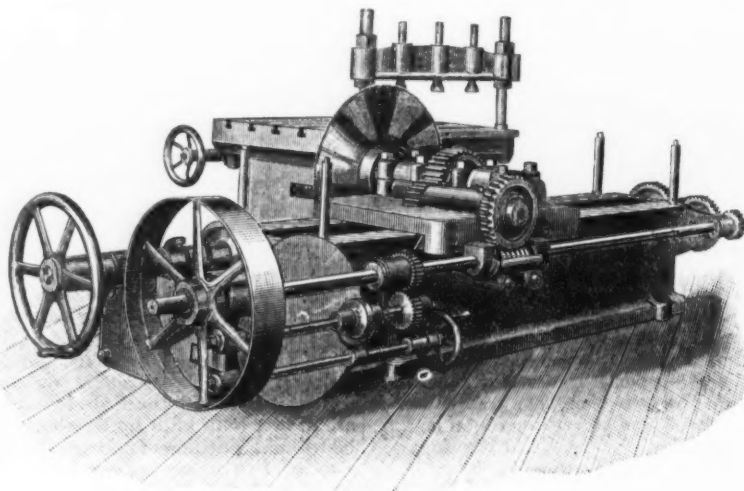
Cold Saw Cutting-Off Machine with 30-Inch Saw.
